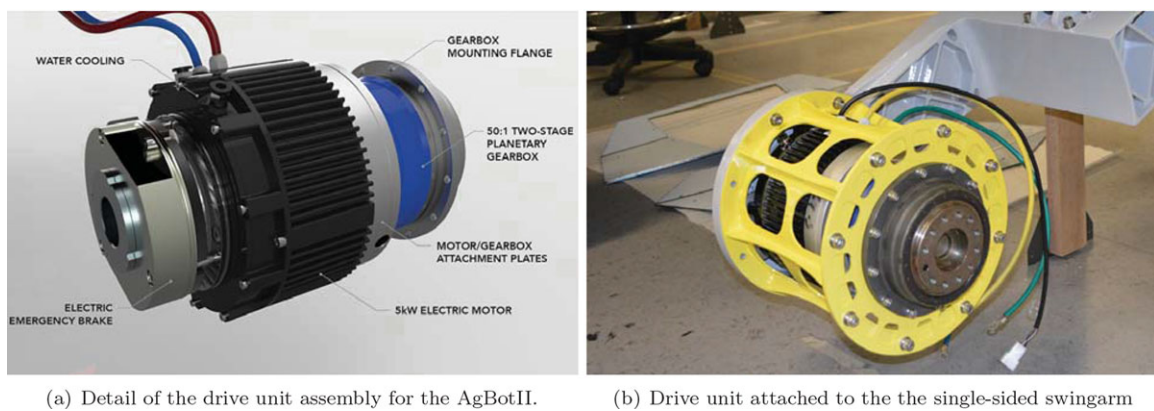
The custom gearbox-motor-brake drive unit assembly for the AgBotII
